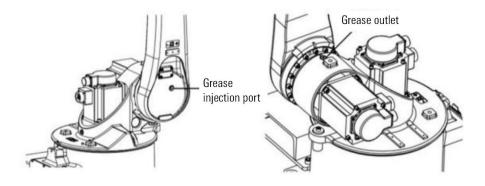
Replace the lubricating grease of J2 axis reducer
